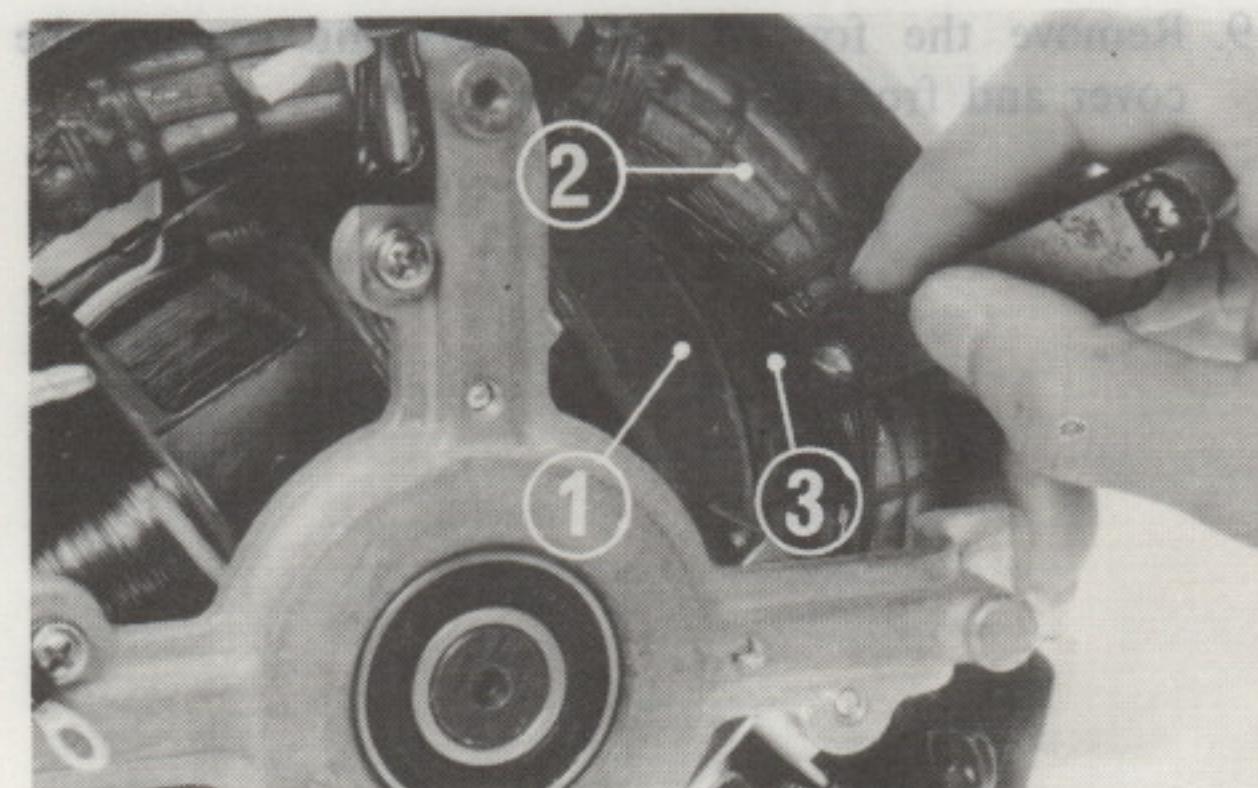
(1) Rotor (2) Stator (3) Feeler gauge
